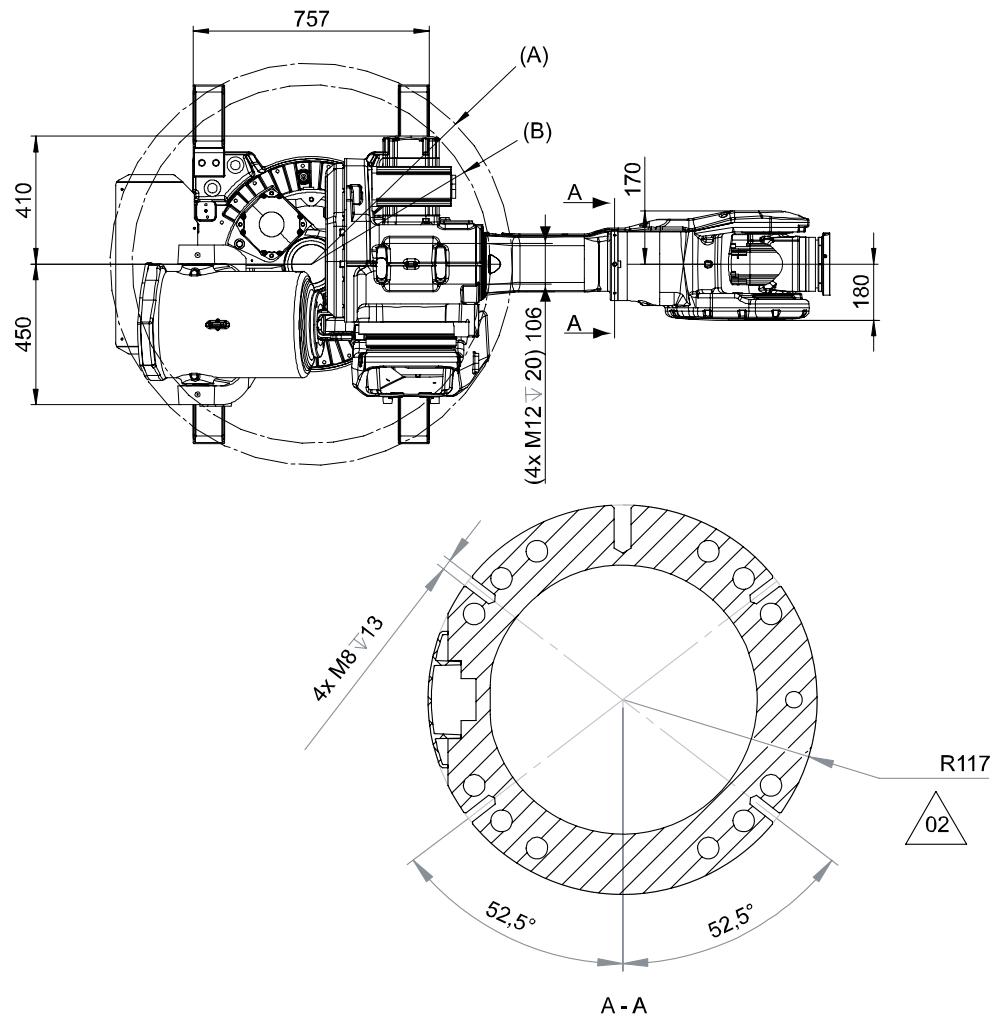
Holes for mounting of extra load on the upper arm on IRB 6640 (dimensions in mm).
